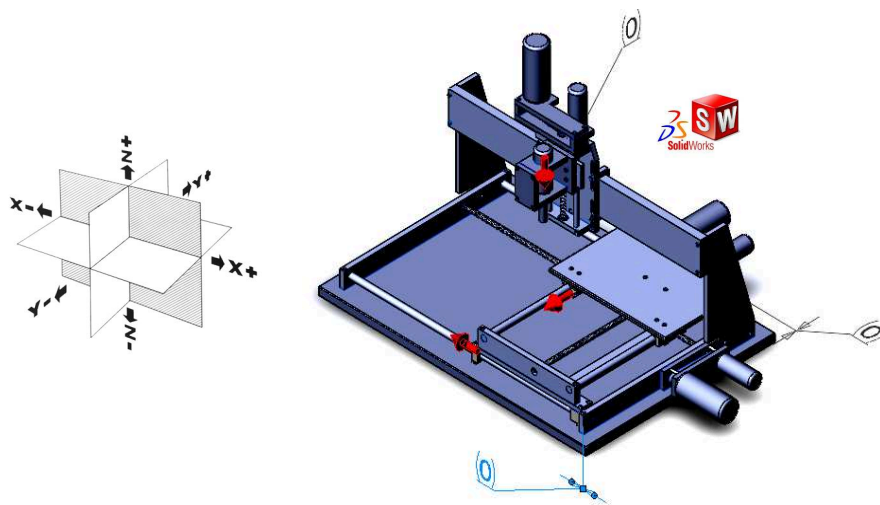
A 3D-CAD of a miniature 3-axis milling machine.
